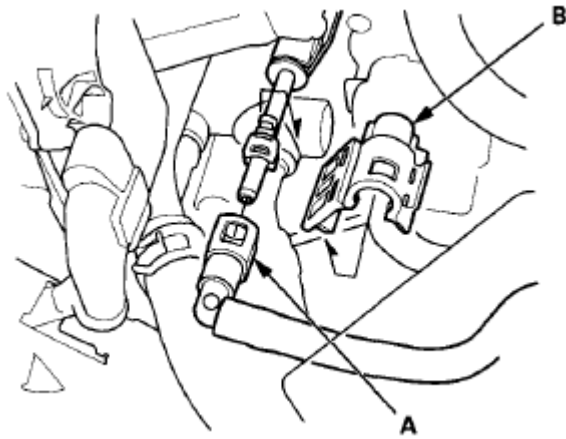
Identifying Fuel Feed Hose And Fitting Cover
